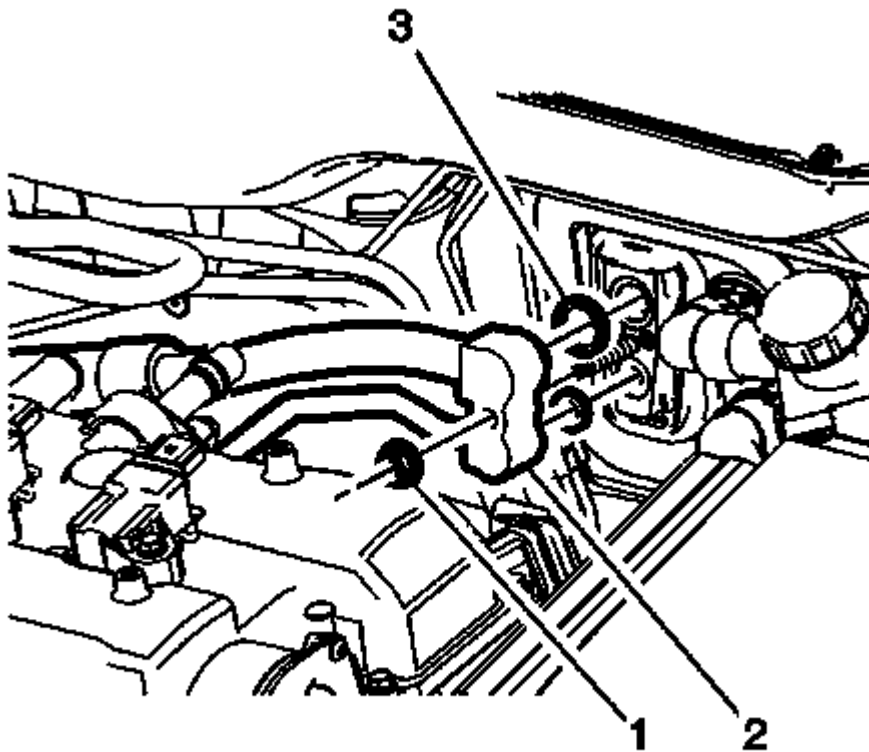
Air Conditioning Evaporator Hose Assembly Nut
